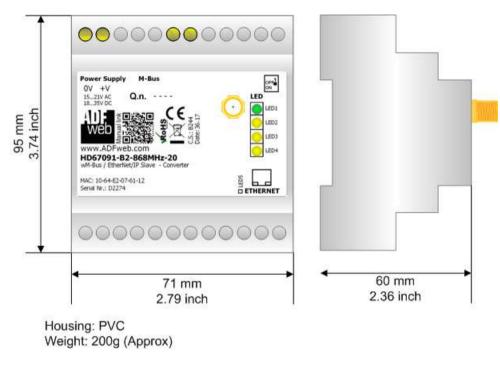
Mechanical dimensions scheme for HD67091-B2-xxxMHz-xxx
